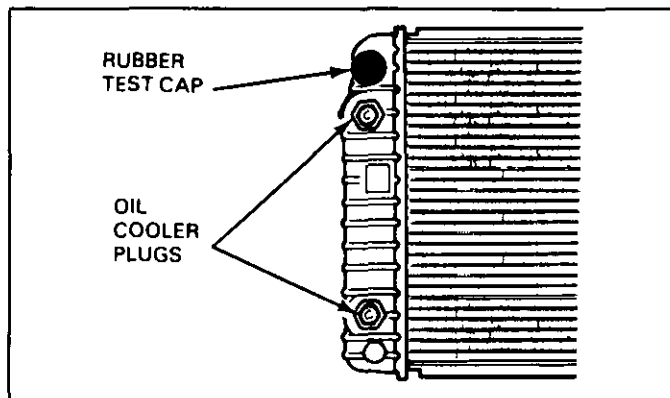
Aluminum Radiator and Oil Cooler Plugs
